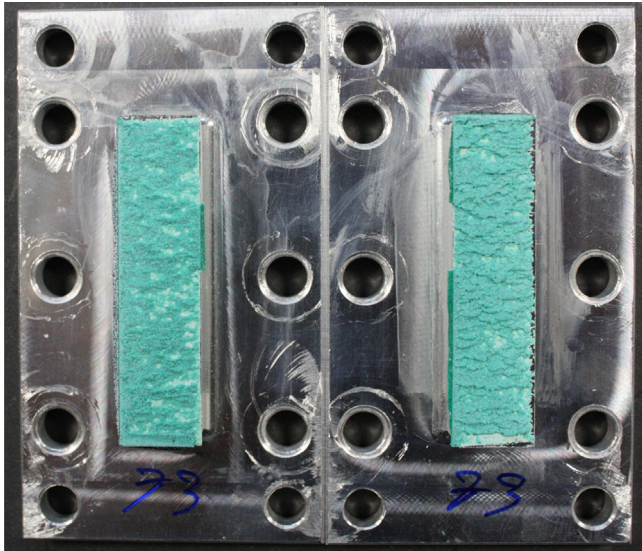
Fracture surface of the Arcan specimen.
